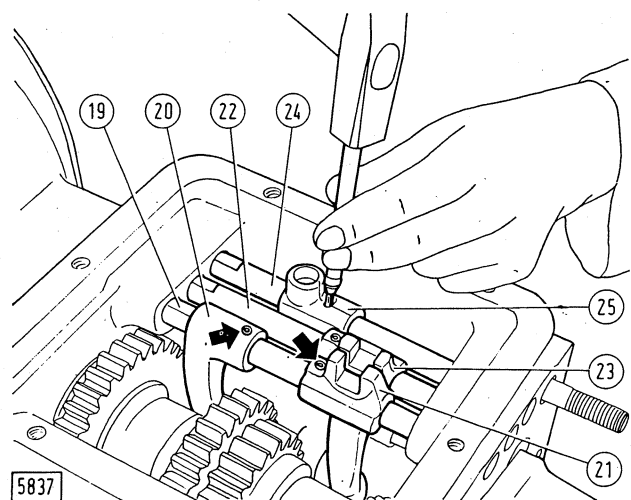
Fitting the transmission speed selector and shifter forks split dowel pins.
